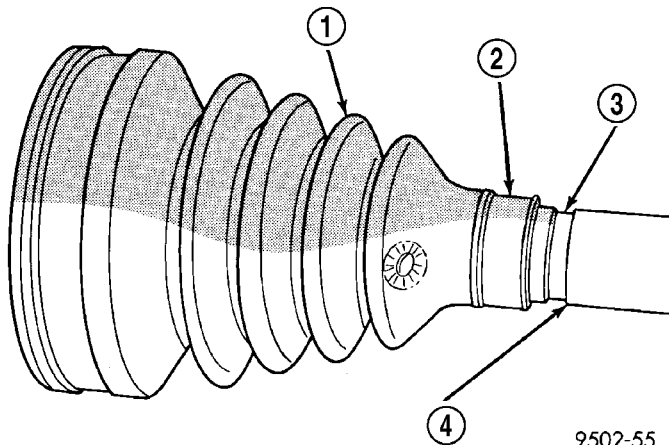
Sealing Boot Installation on Interconnecting Shaft
